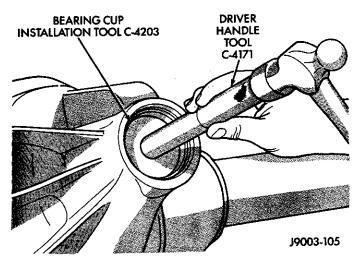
Shaft Outer (Front) Bearing Cup Installation
